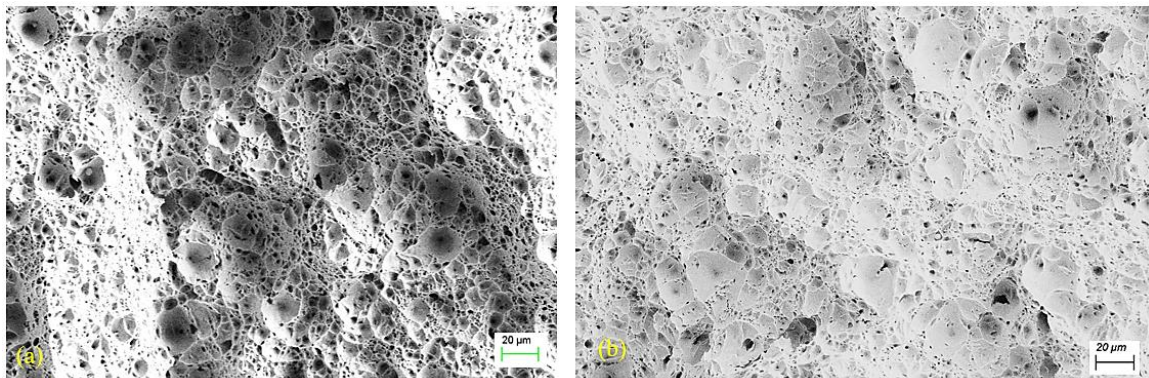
Fracture appearance of the specimens tested at (a) 540°C and (b) 560°C
